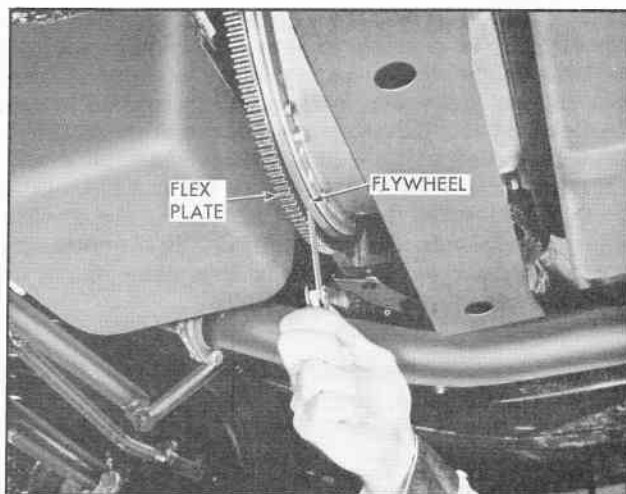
Measuring Clearance Between Flywheel and Flex Plate
